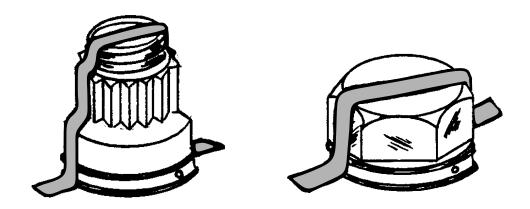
Torque Stripe Marking of PLI Washer/Bolt Assemblies
